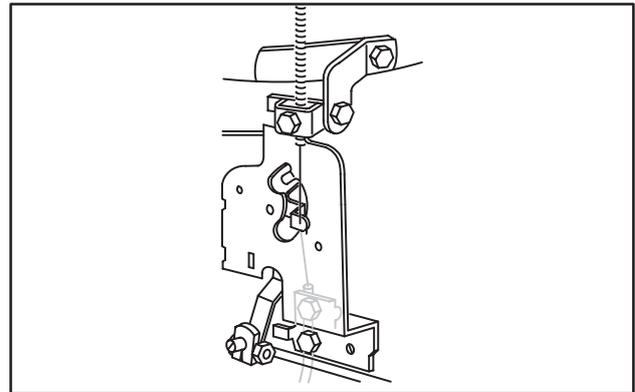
Early Style, 170700, 171700, 190700, 191700, Swivel Control Bracket for Briggs & Stratton One Piece Flo-Jet Carburetors
